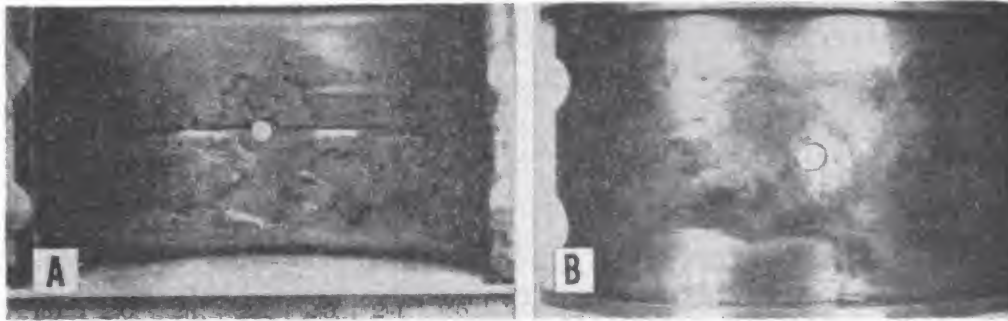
Bearing failures caused by faulty installation.
